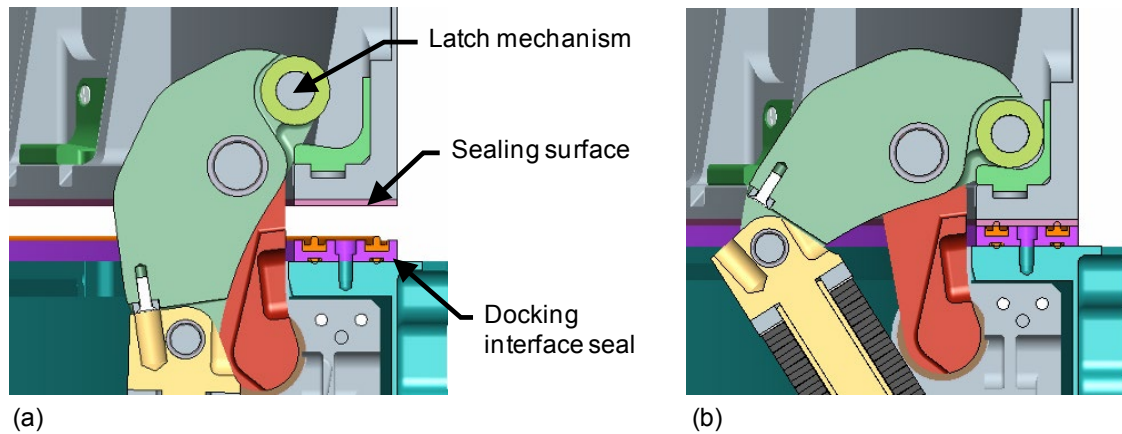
Representative views of docking interface (a) just before latch mechanisms engage and (b) after latches have fully compressed the seal.
